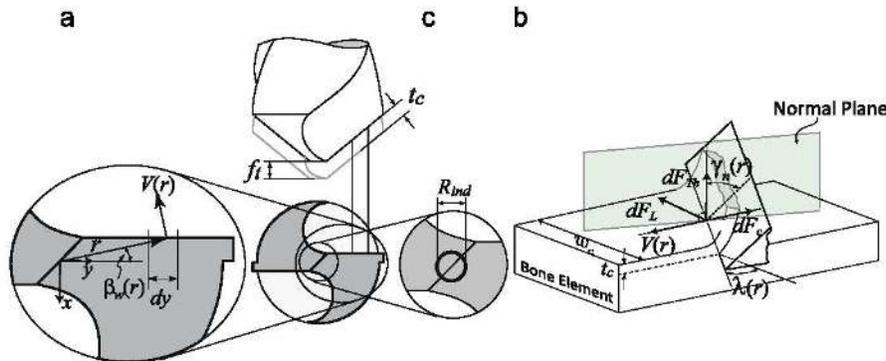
Cutting geometry during drilling: (a) kinematic parameters for a cutting-lip element, (b) oblique cutting geometry and cutting forces, and (c) the indentation radius on the chisel edge.
